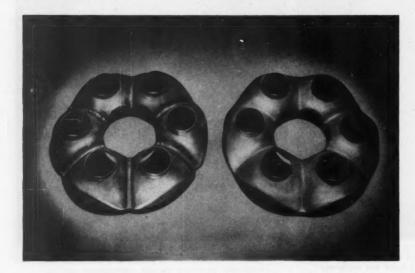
Fuel nozzle swirl-cup for the combustion chamber liner of a turbo-jet engine formerly made by welding together six preformed sections, as seen at left, is now Hydroformed, as shown at right.
